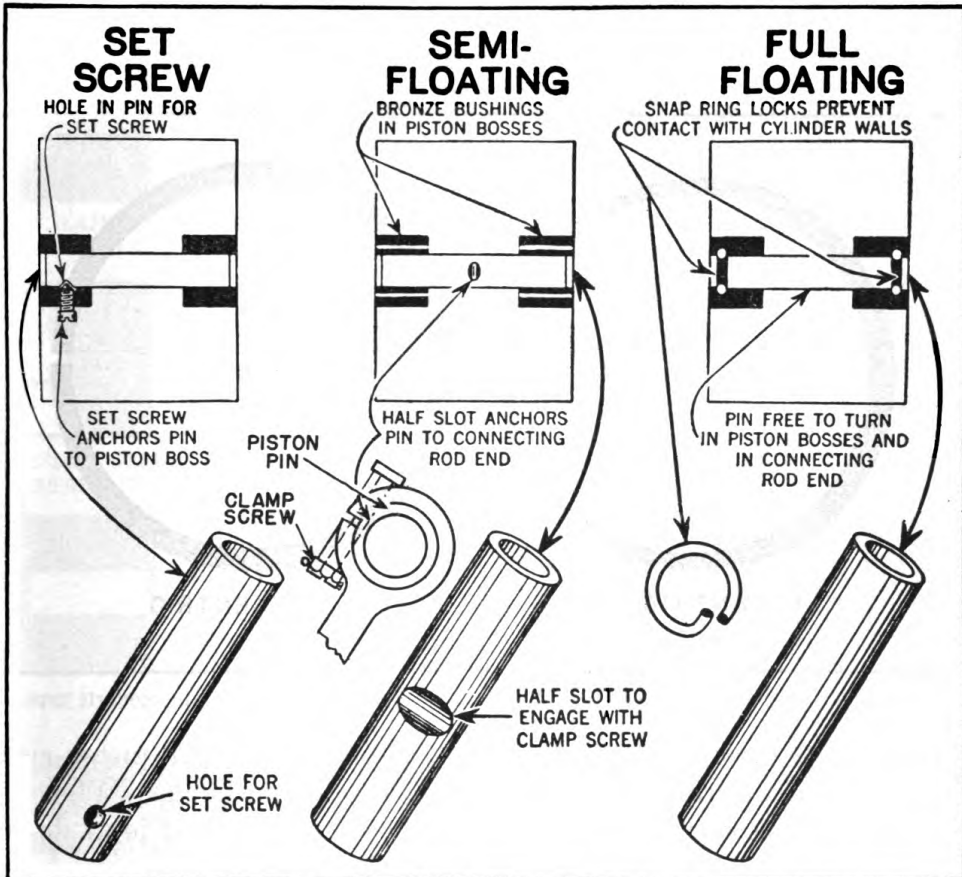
Methods of securing piston pins within piston or connecting rod.
